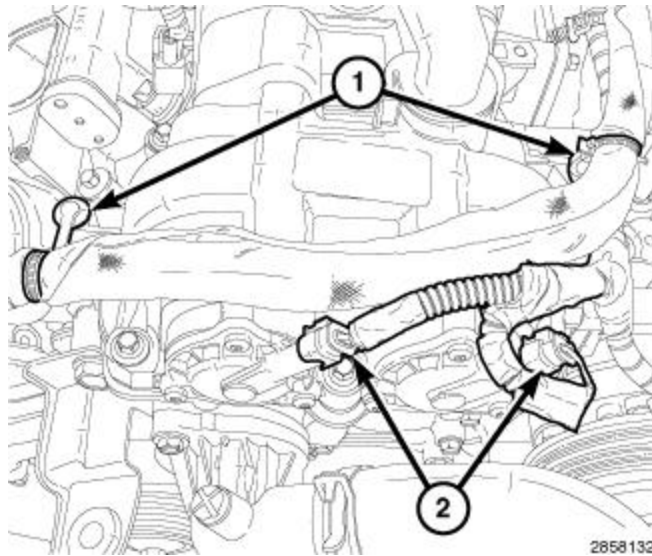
Variable Valve Timing Solenoid Connectors & Wire Harness Retainers
